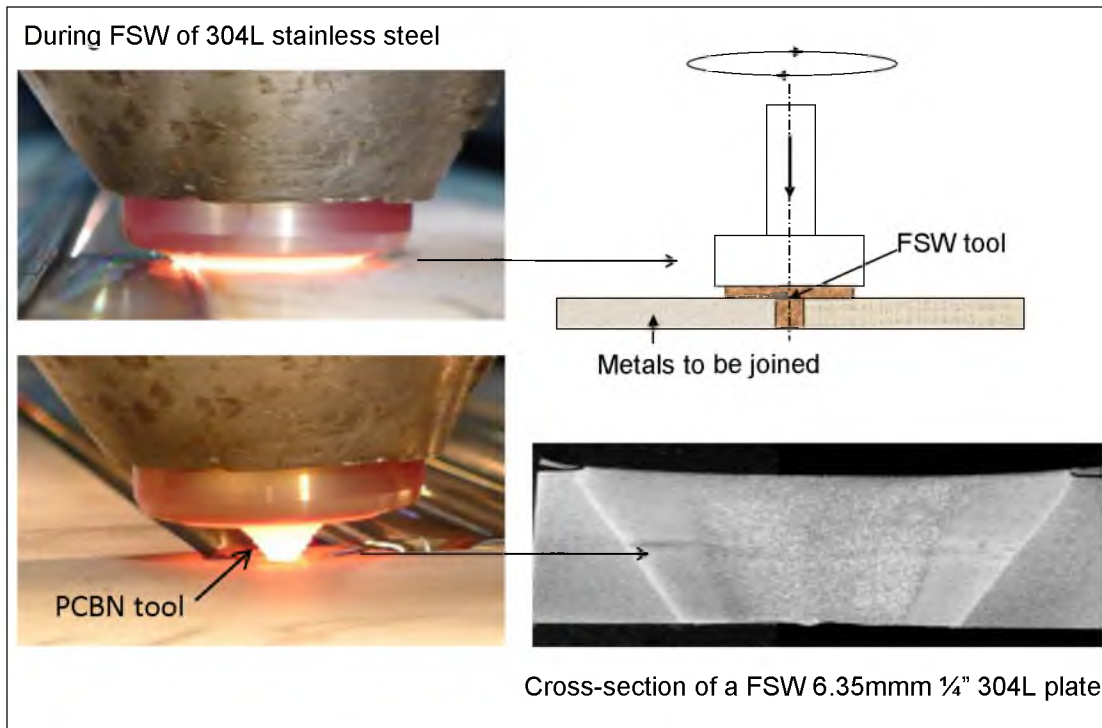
FSW 1/4" thick 304L stainless steel plate using a PCBN tool
